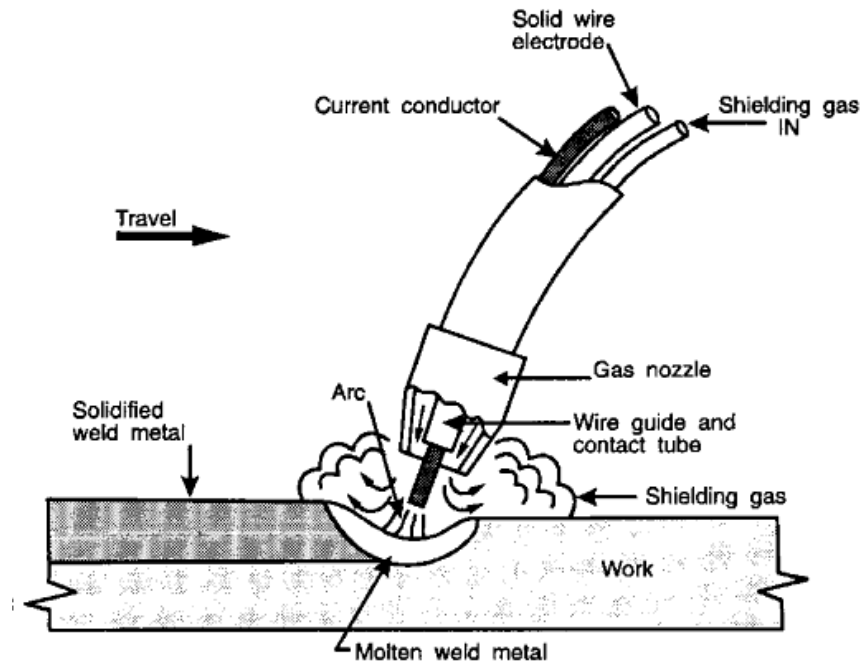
Gas Metal Arc Welding (GMAW) (Blodgett and Miller, 1996)
